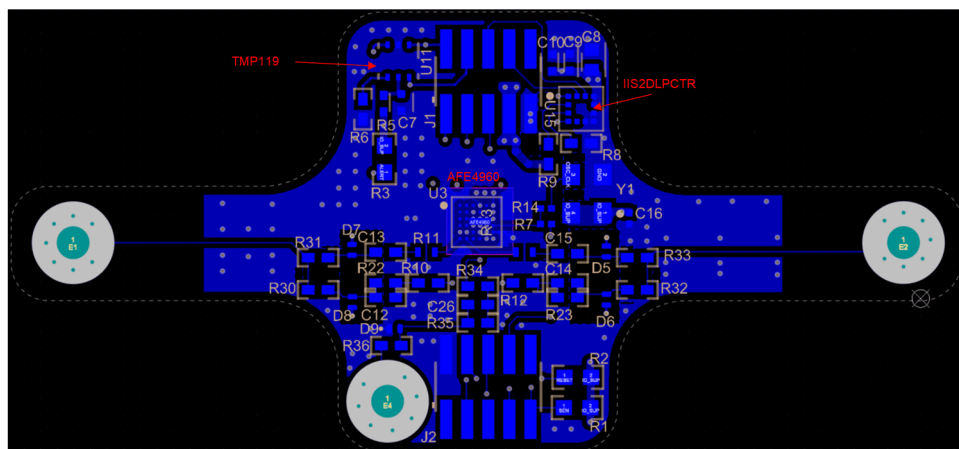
Layout for the Bottom Layer of Sensor Board
